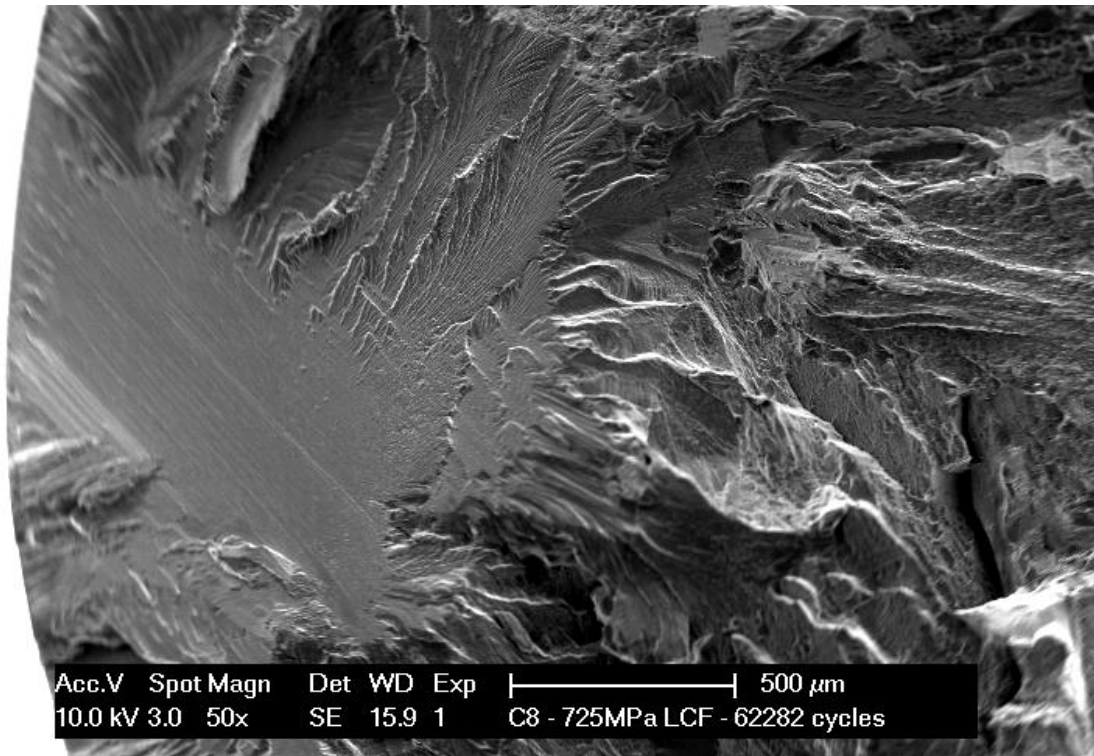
LCF test specimen C8, 725MPa, 62,282 cycles to failure. Possible cleavage (featureless) cracking, transition into ductile failure
